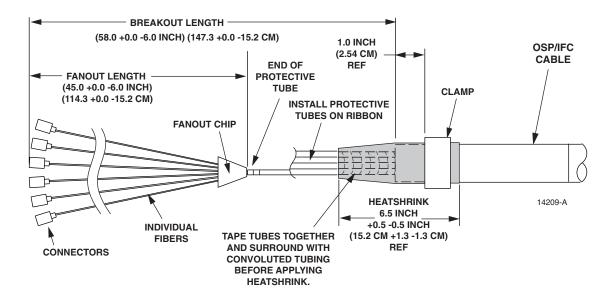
OSP Stranded Cable or OSP/IFC Ribbon Cable Breakout Dimensions
